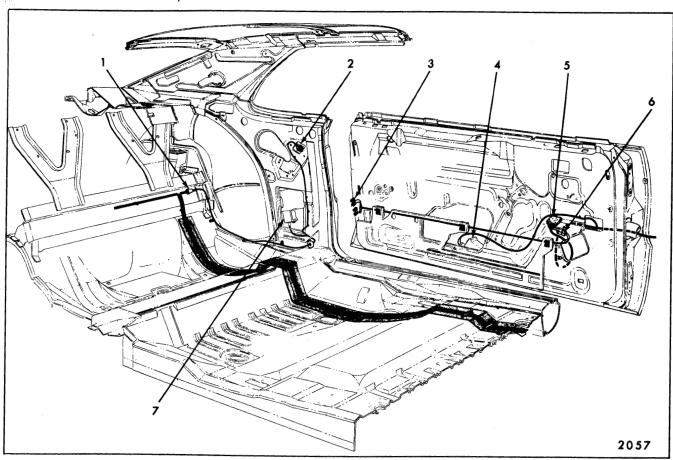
Left Side Power Window Wiring - Oldsmobile "E" Optional
